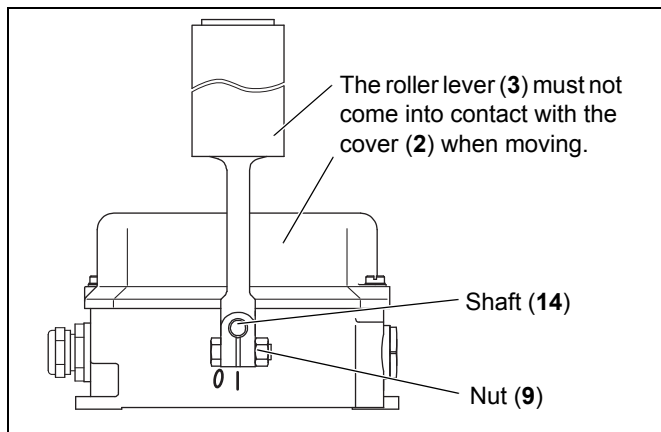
Mounting the roller lever on the belt misalignment switch
